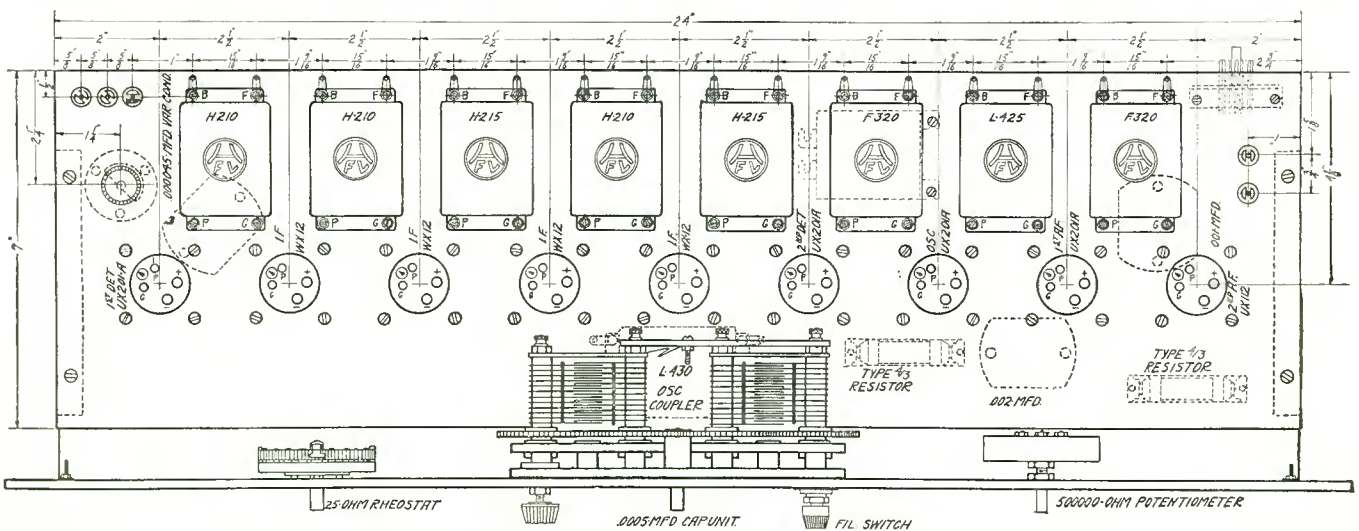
Baseboard layout showing arrangement of apparatus on sub-panel
